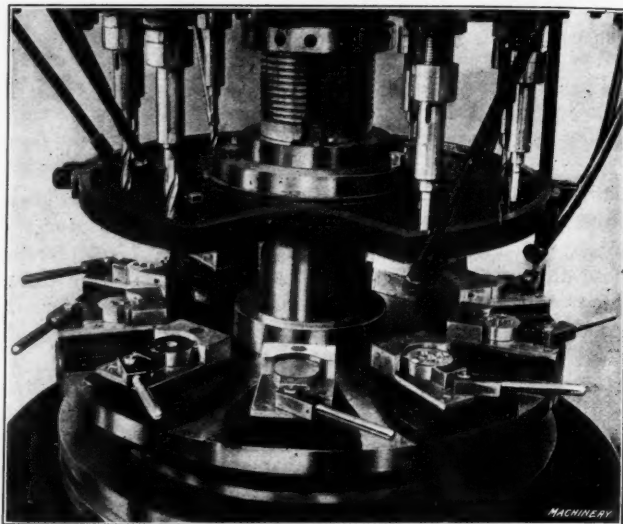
Close View of Work Table and Bushing Holders shown in Fig. 1.
